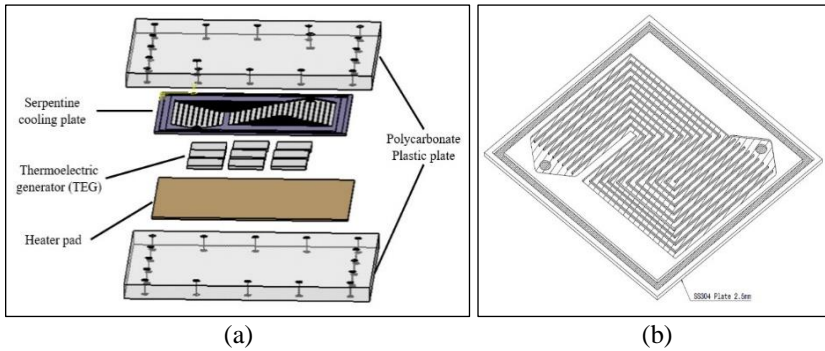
(a) PEMFC-TEG set-up assembly and (b) isometric view of serpentine cooling plate
